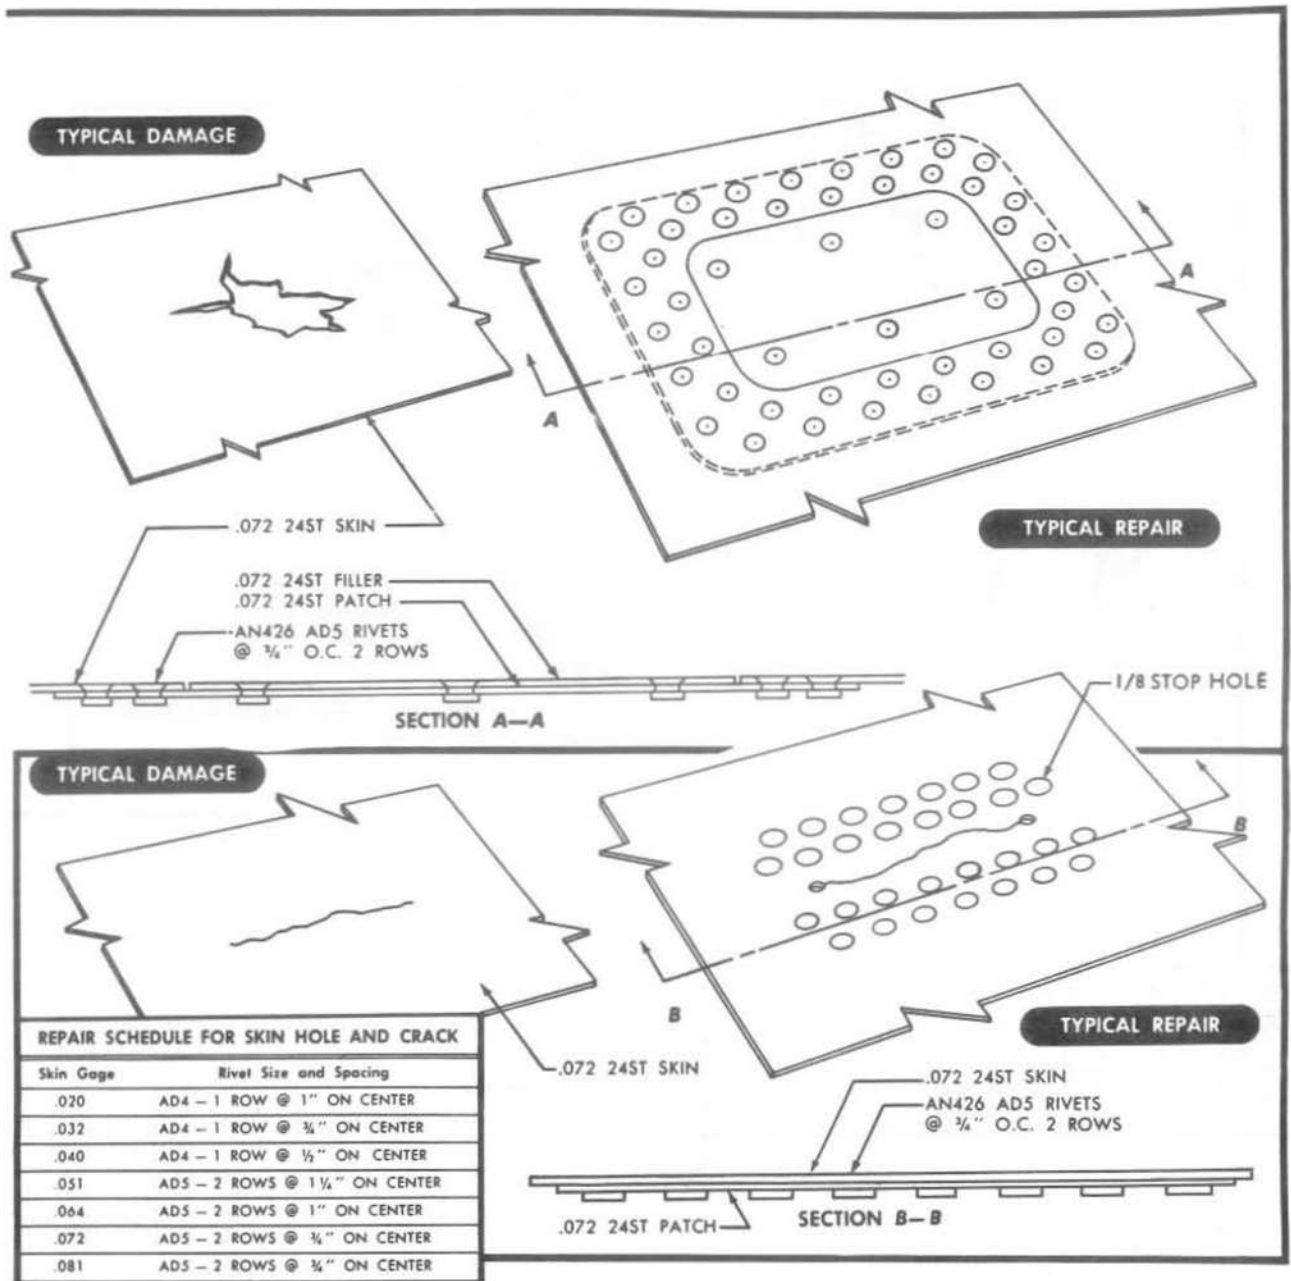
Patch Repair of Damage to Mechanics Floor and Corrugation
